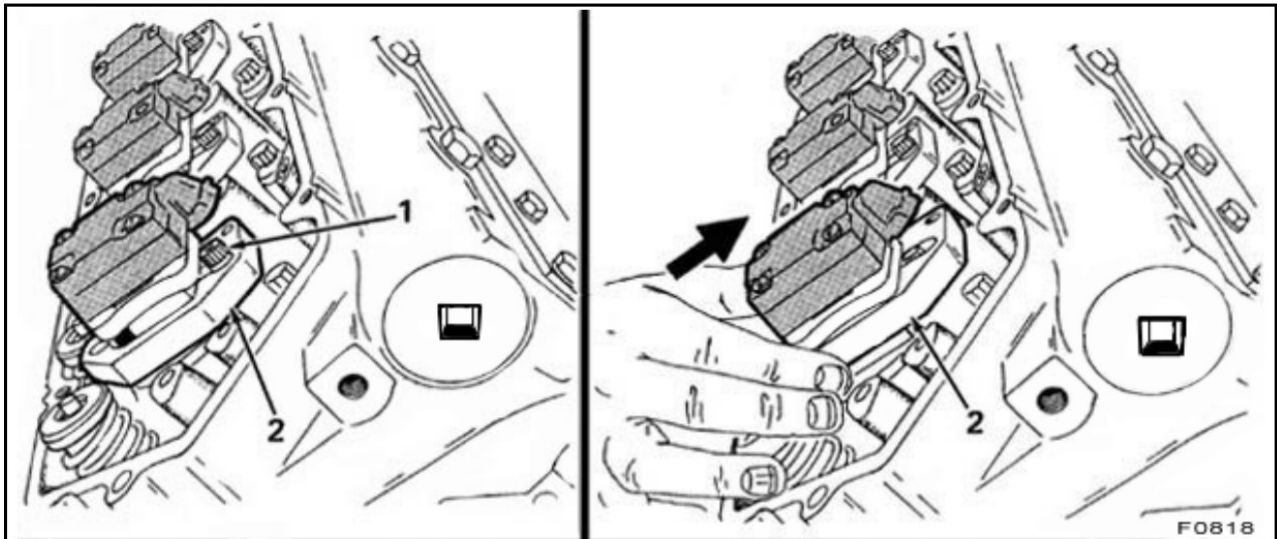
Disengaging the Fuel Injector Hold Down Clamp
